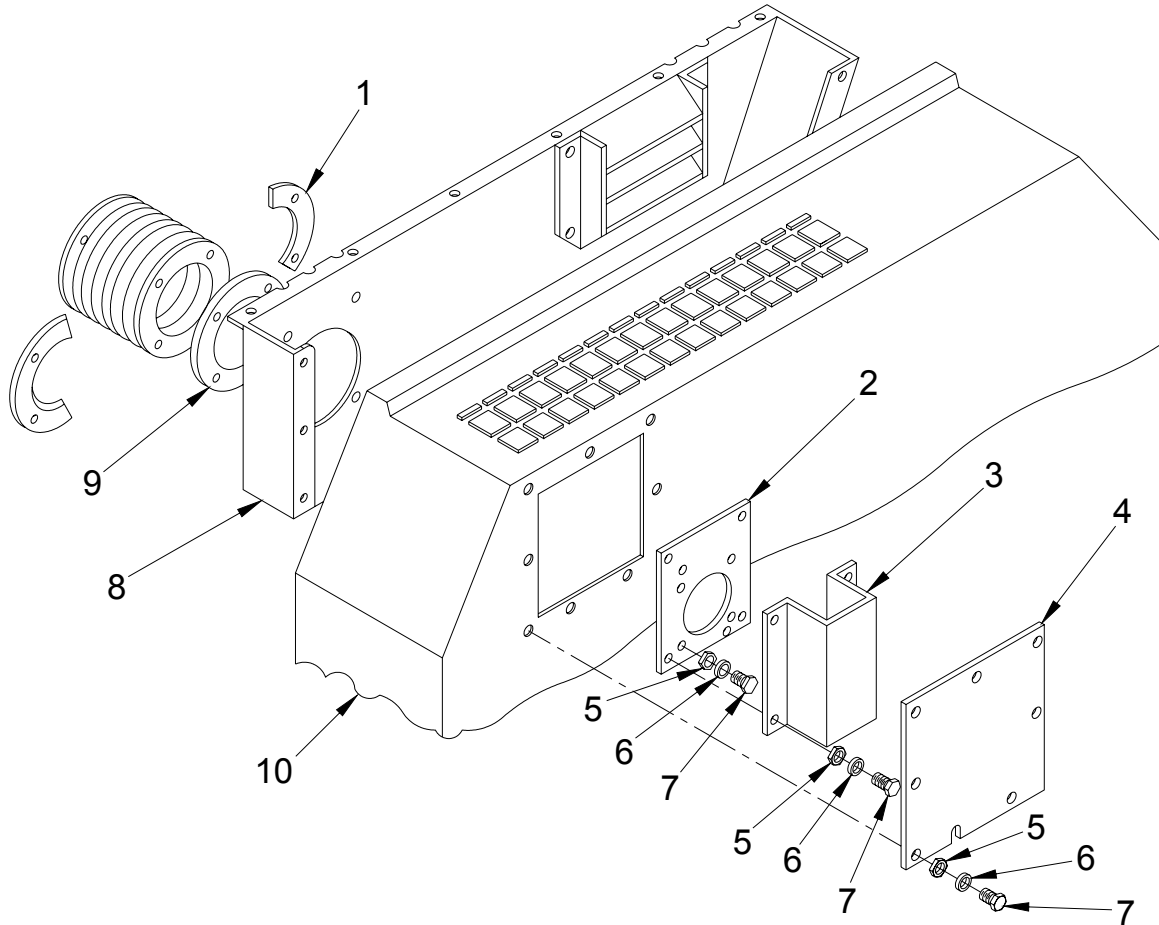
EXHAUST SYSTEM ASSEMBLY/DUCT ASSEMBLY
